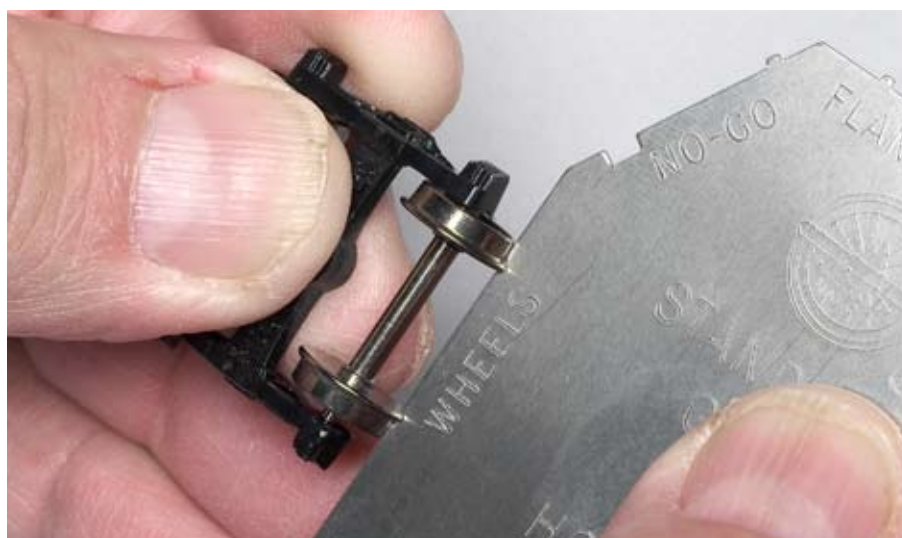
Check wheel gauge. A pair of notches in the left side of this NMRA HO scale Mark IVb gauge measure the spacing of the wheels in an RP-25 wheelset.
